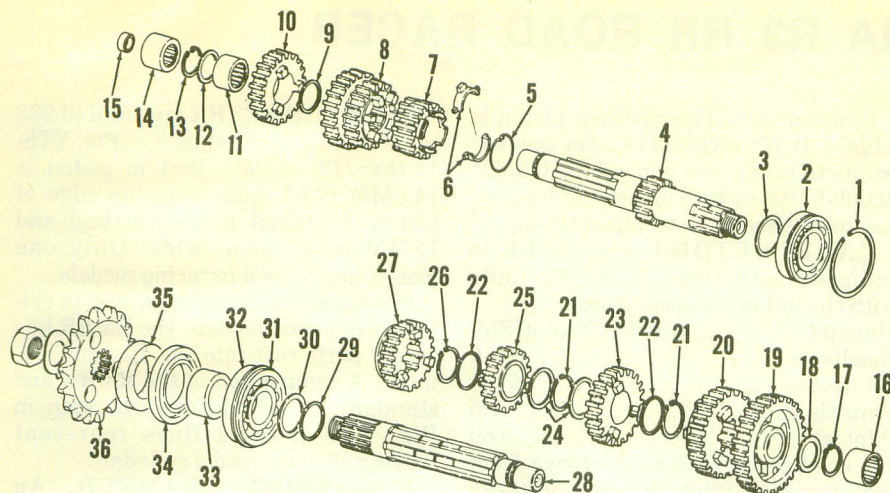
Exploded view of the transmission assembly. Refer to Fig. Y8-21 for view of parts installed in the top half of crankcase.
